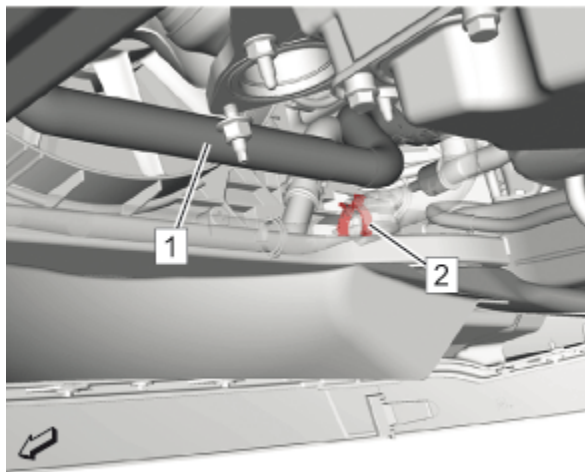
Drive Motor Battery Coolant Cooler Inlet Hose And Retainer
